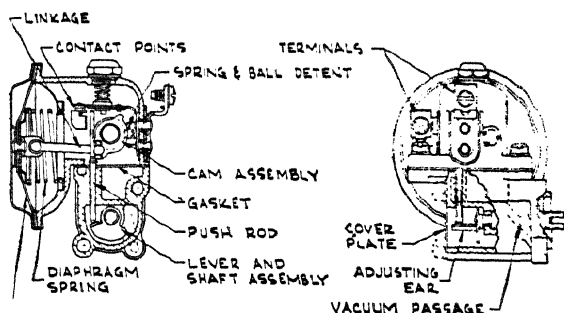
CARBURETTOR CONTROL MOUNTED VACUUM SWITCH
